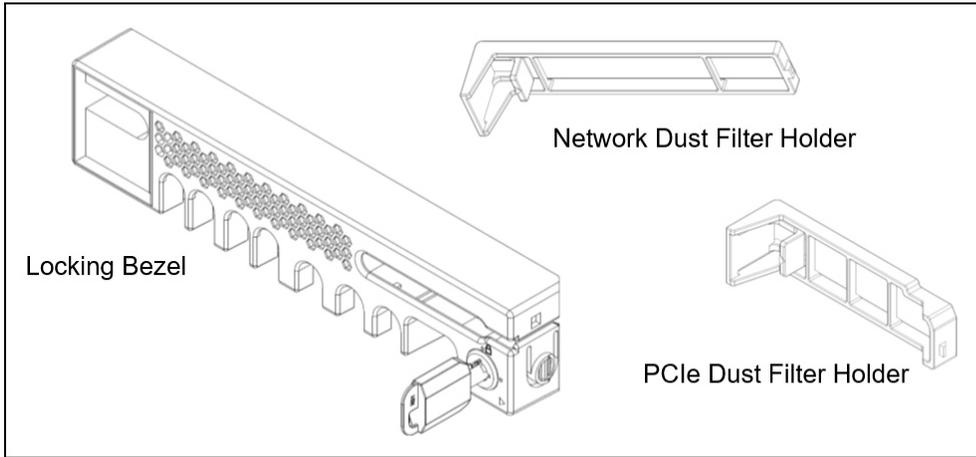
Locking Bezel and Filter Holders (4M17A37599)
